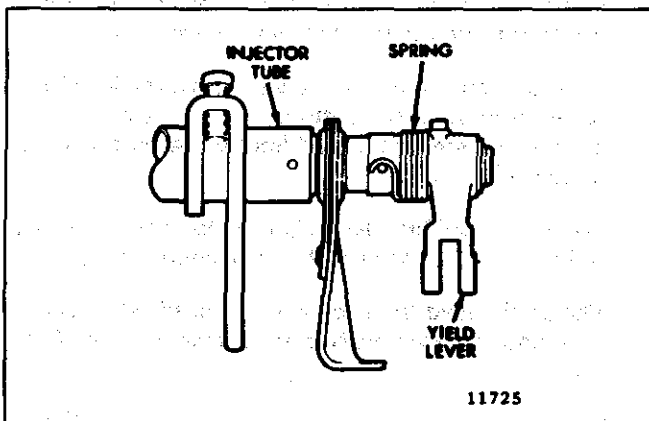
Throttle Delay Yield Lever (In-line Engine)
